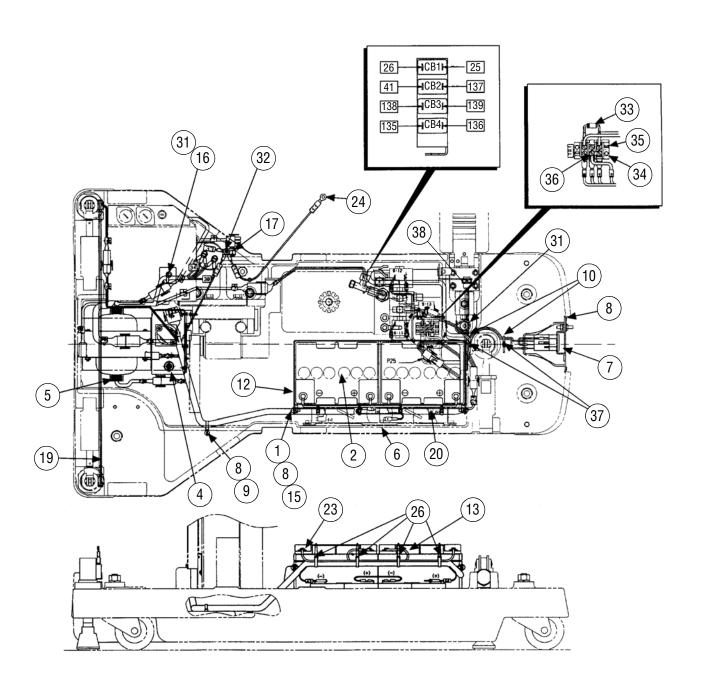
Table Base and Column: Electrical Assembly (1 of 3)
